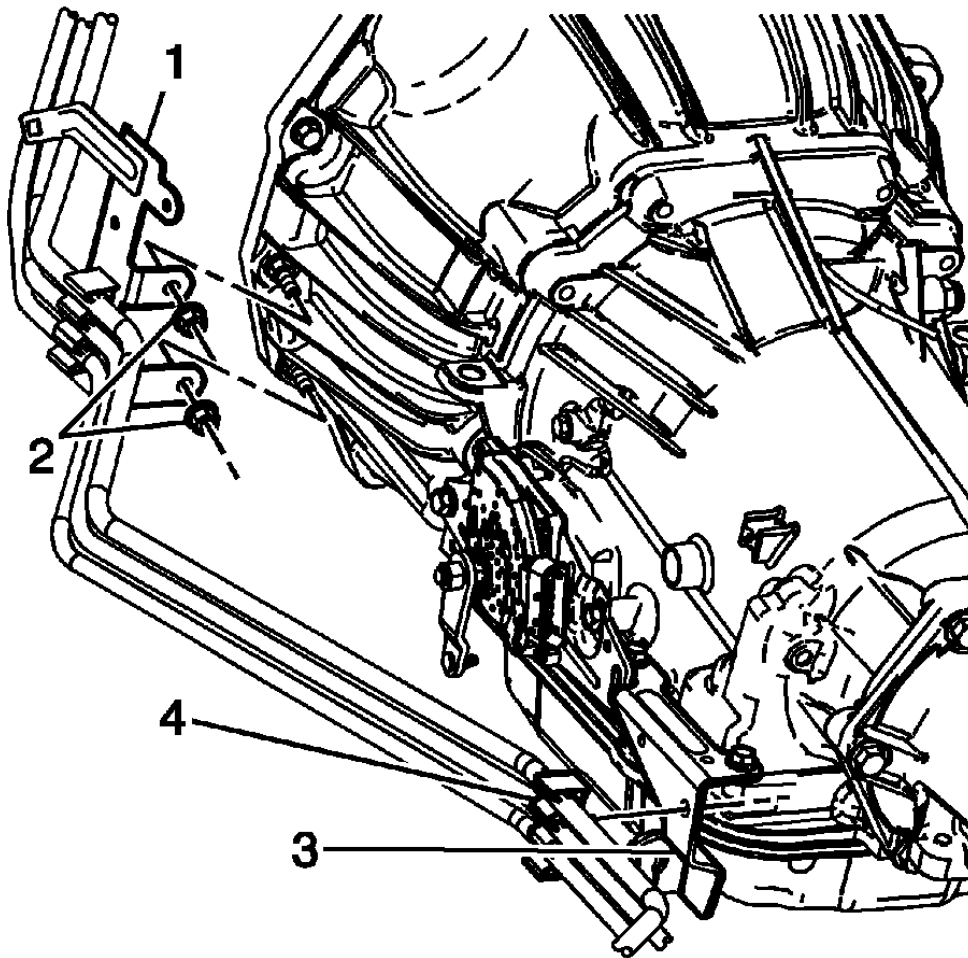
View Of Fuel Hose/Pipe Bracket & Nuts (M30)
